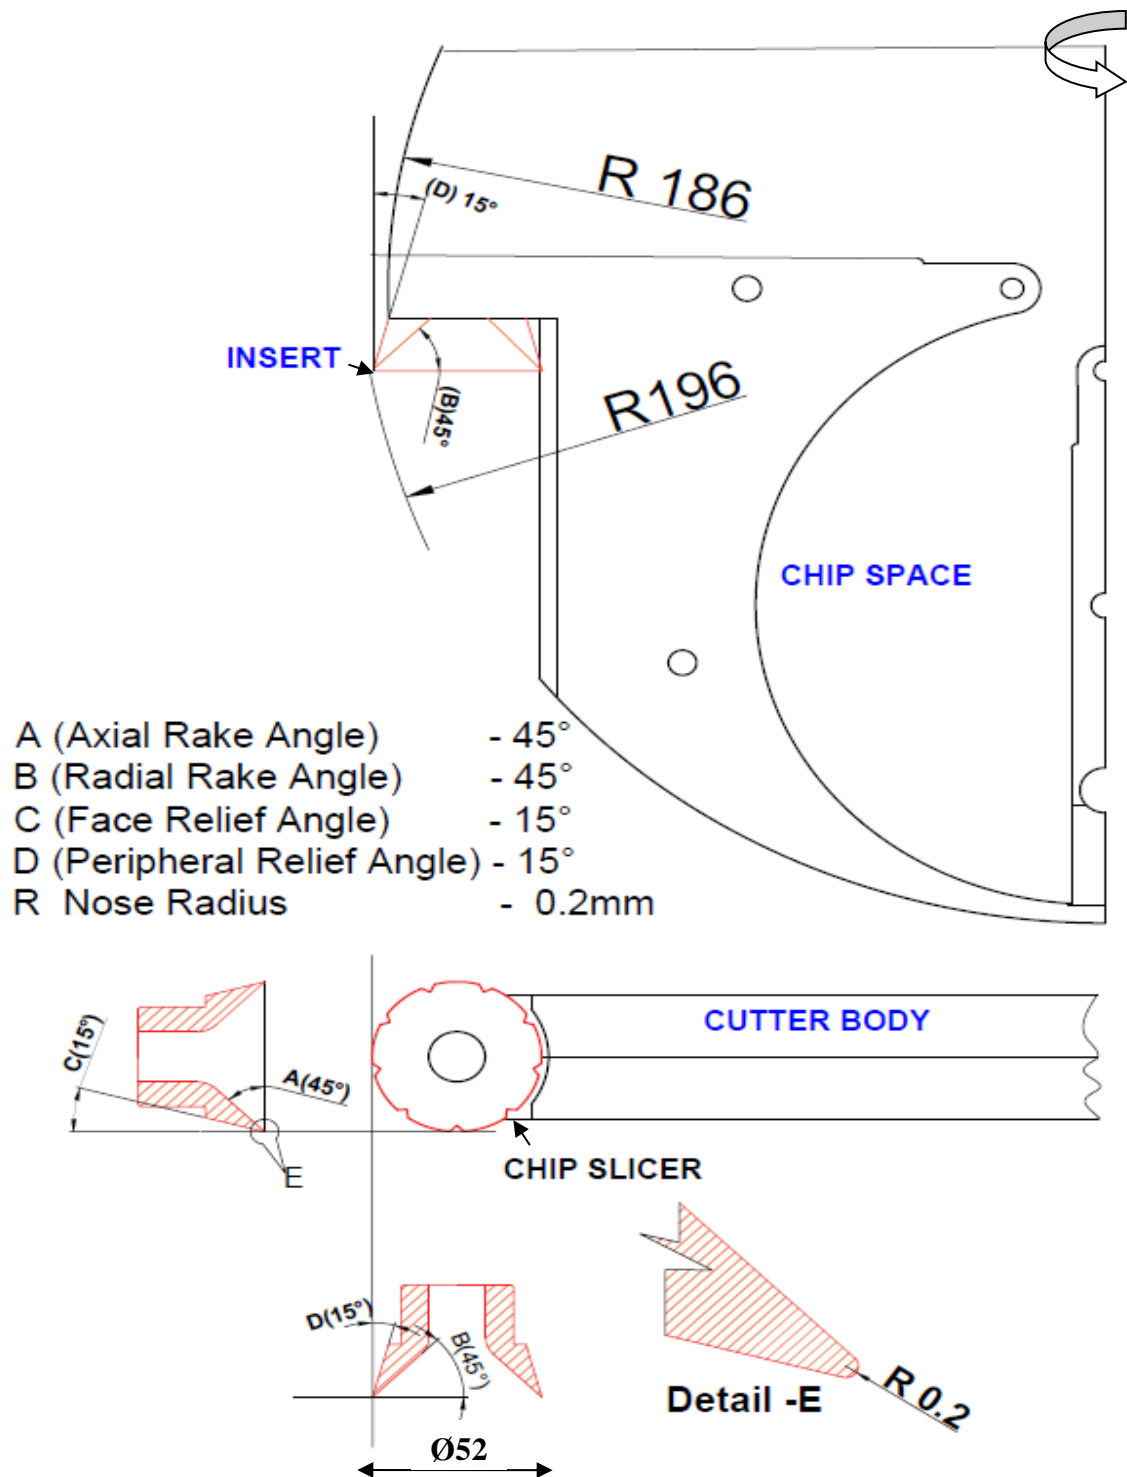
Tool signature of Prototype Contouring Cutter
